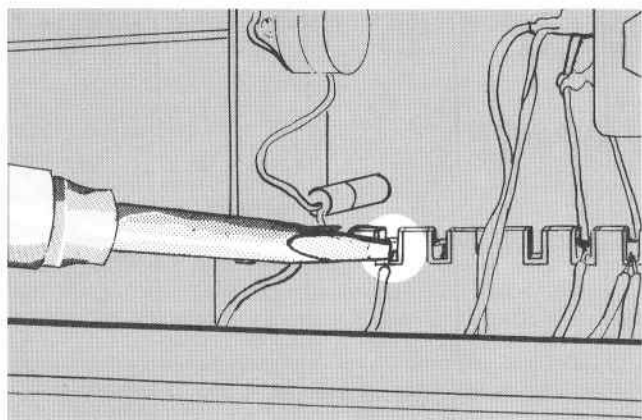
Correct method of applying heat in soldering to a ceramic strip.
